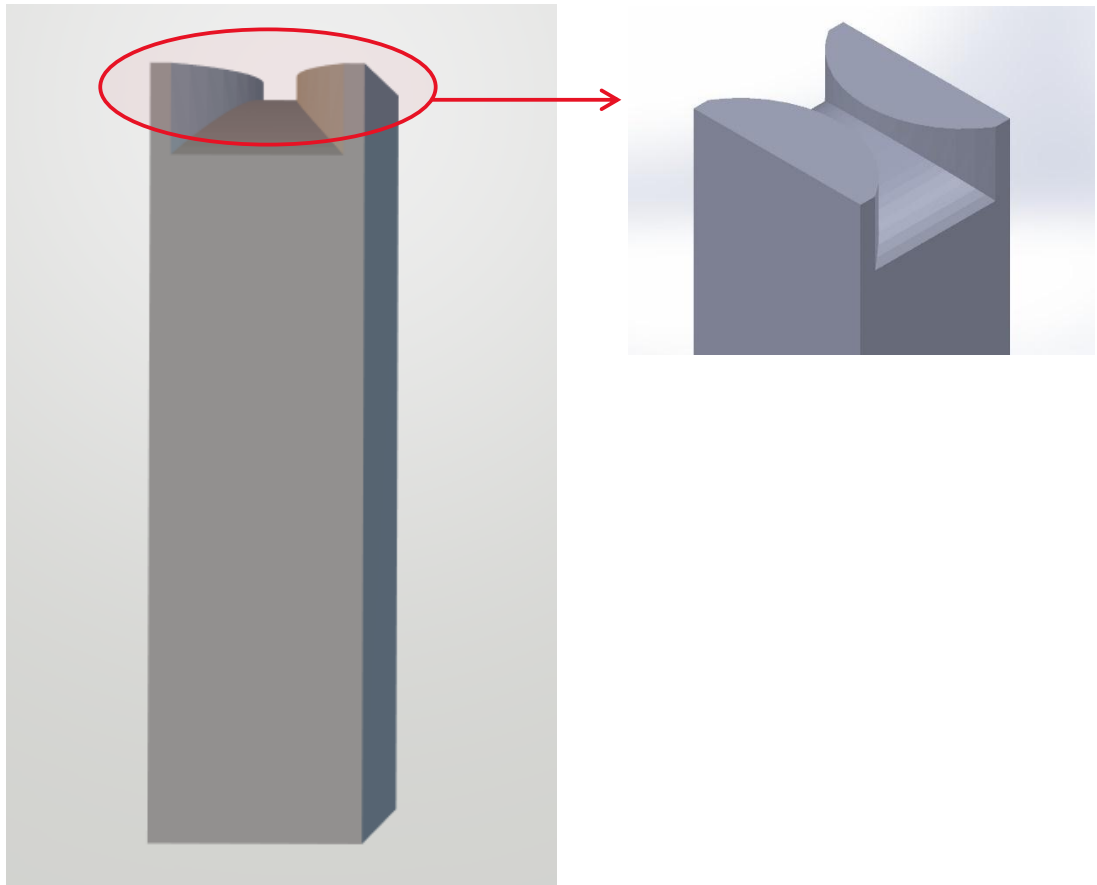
Geometrical Arrangement #1 Modelled on SOWDWORKS
